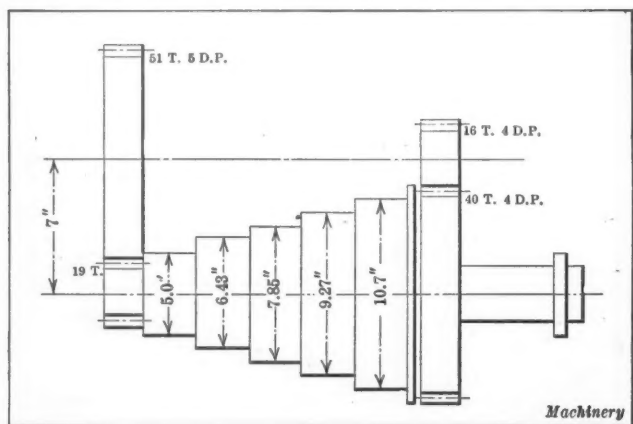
Designer's Sketch of Cone Pulley and Back-gearing of Lathe Headstock
